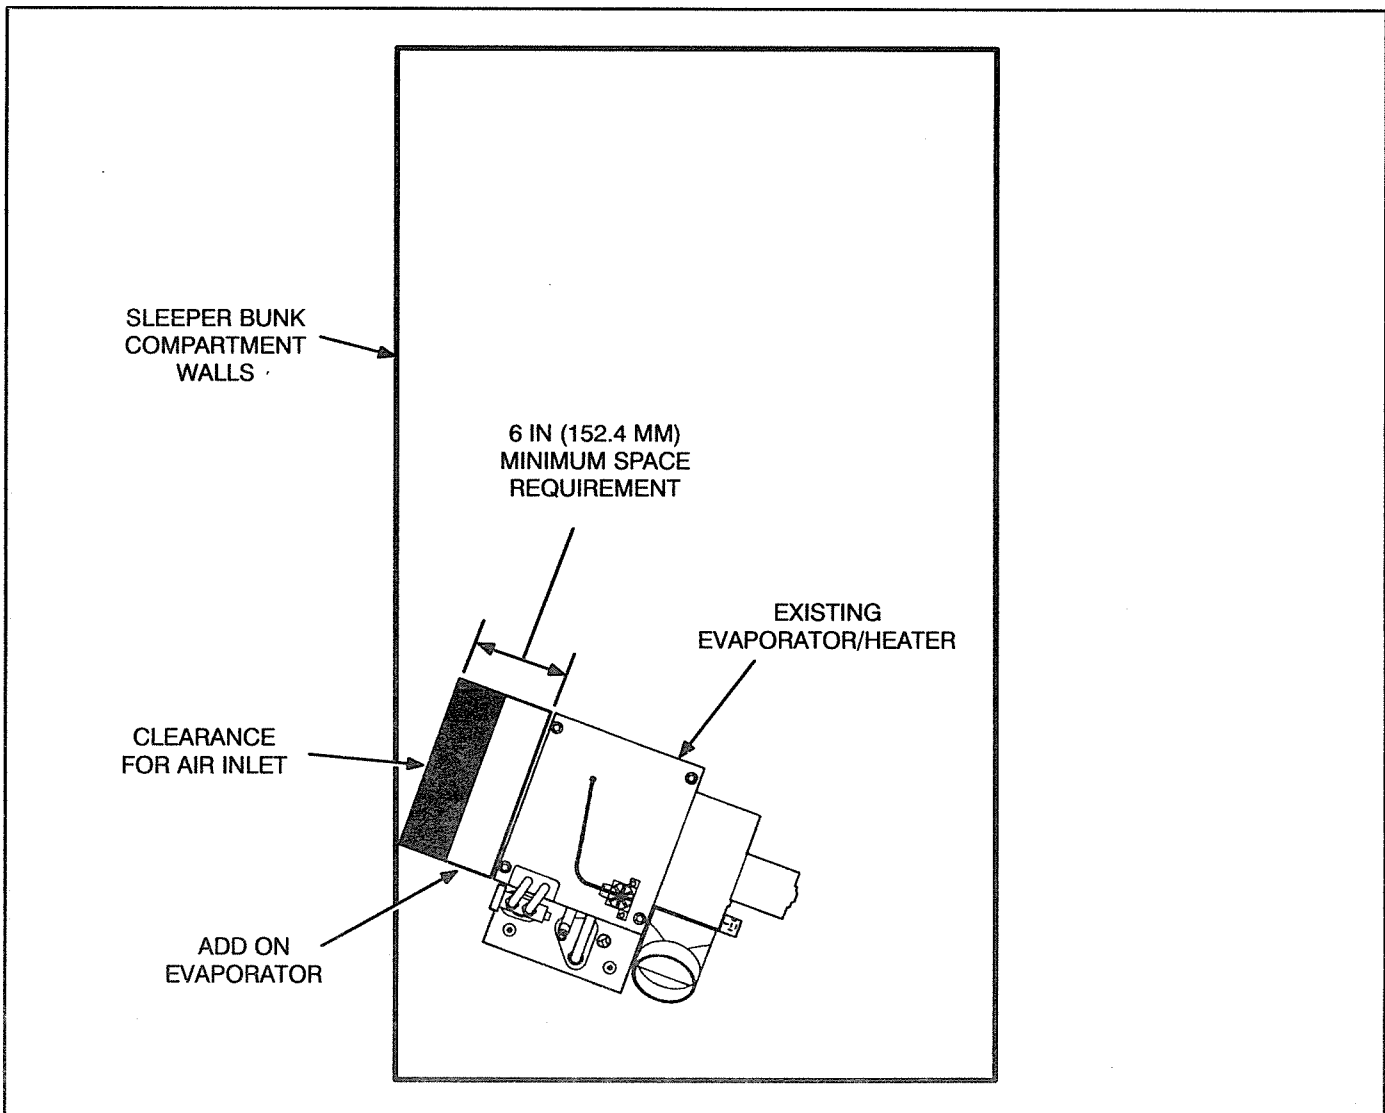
PIGGYBACK EVAPORATOR AND AIR INLET SPACE REQUIREMENTS
